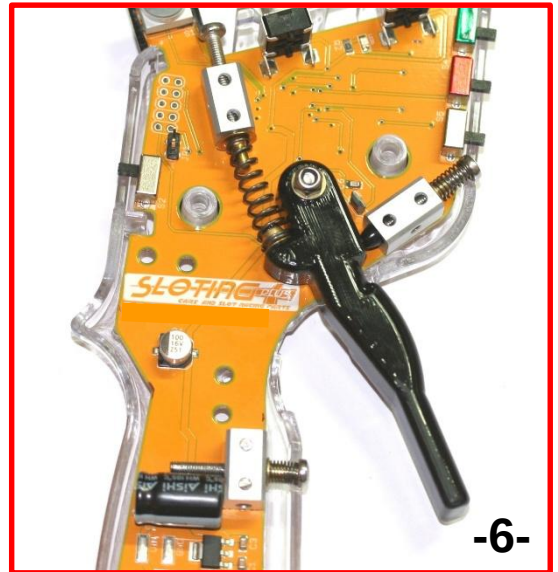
You can now install the spring and the brass guard. The trigger is ready.
